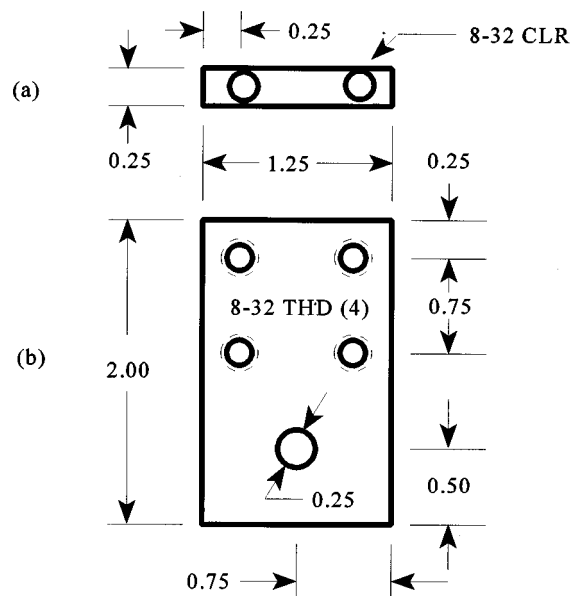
The dye cell holder. This is constructed from 0.25-in.-thick plastic (we used Lexan). Two of the clamping pieces (a) are needed. The dye cell is sandwiched between the clamping pieces and the main holder (b) using four, 1-in.-long 8-32 screws. A 0.5-in.-long, 0.25-in.-diam pin is glued into the 0.25-in. hole on the main holder. This pin fits into the optical mount used to hold the dye cell assembly.
